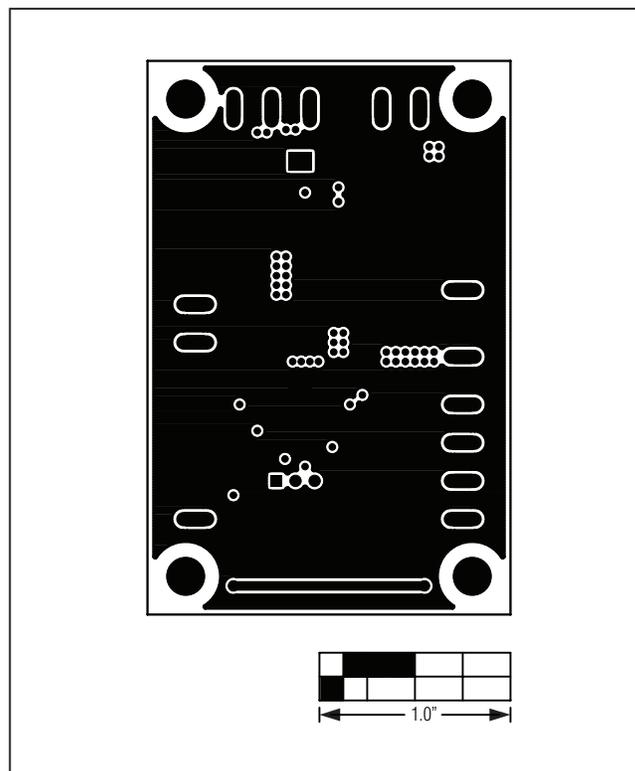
MAX17512 EV Kit PCB Layout—Solder Side
